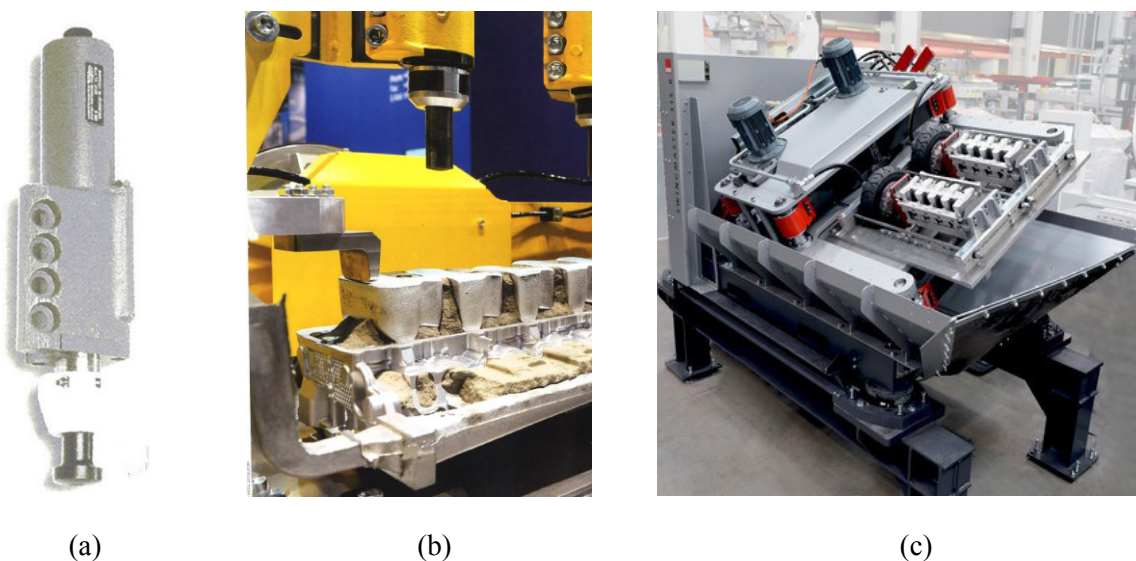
Examples of state-of-the-art mechanical core removal equipment applied for cast-Al parts. (a): Pneumatic hammer [20]; (b): Hammering station with a clamped casting containing sand cores, as exhibited on the ‘GIFA’ 2015 fair [22]; (c): Vibration shake-out unit with clamped cylinder heads [23].
